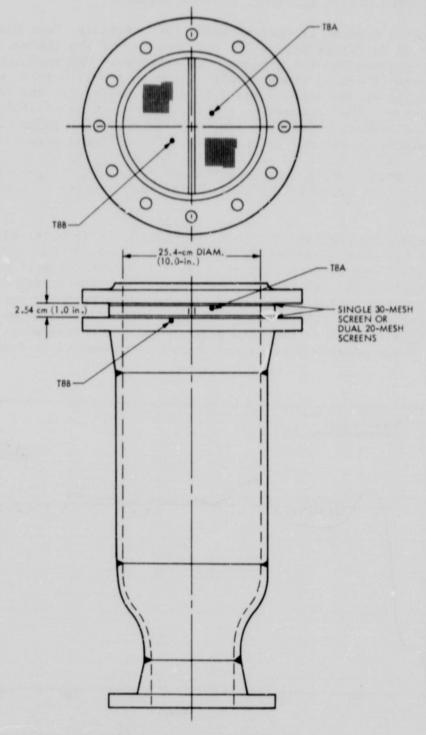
Screen-Type Arrester Test Assembly, 25.4-cm Diameter, Schematic Drawing
